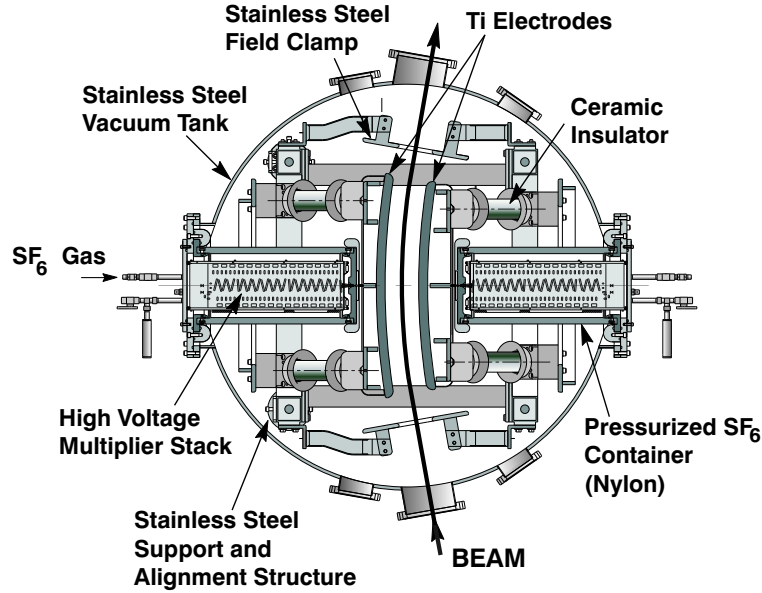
Plan view showing the interior construction of the DRAGON electrostatic dipole bender.
